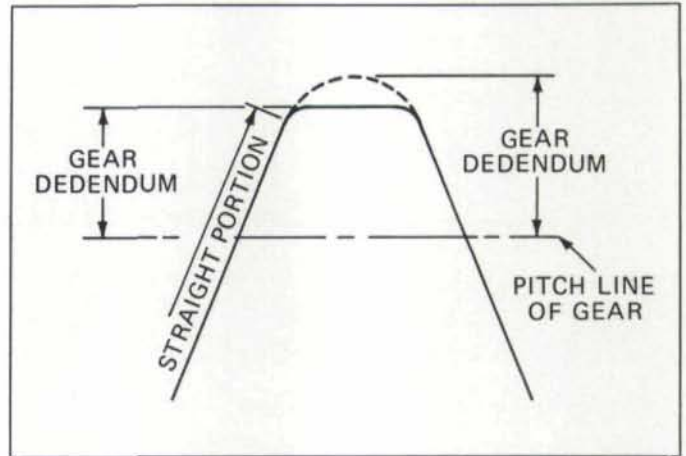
Tooth form of preshaving hob. If full rounded root fillets are desired, additional whole depth becomes necessary.
